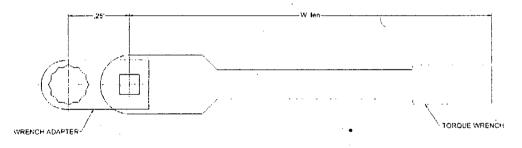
Wrench Adapter and Wrench Torque Arm Dimensions
